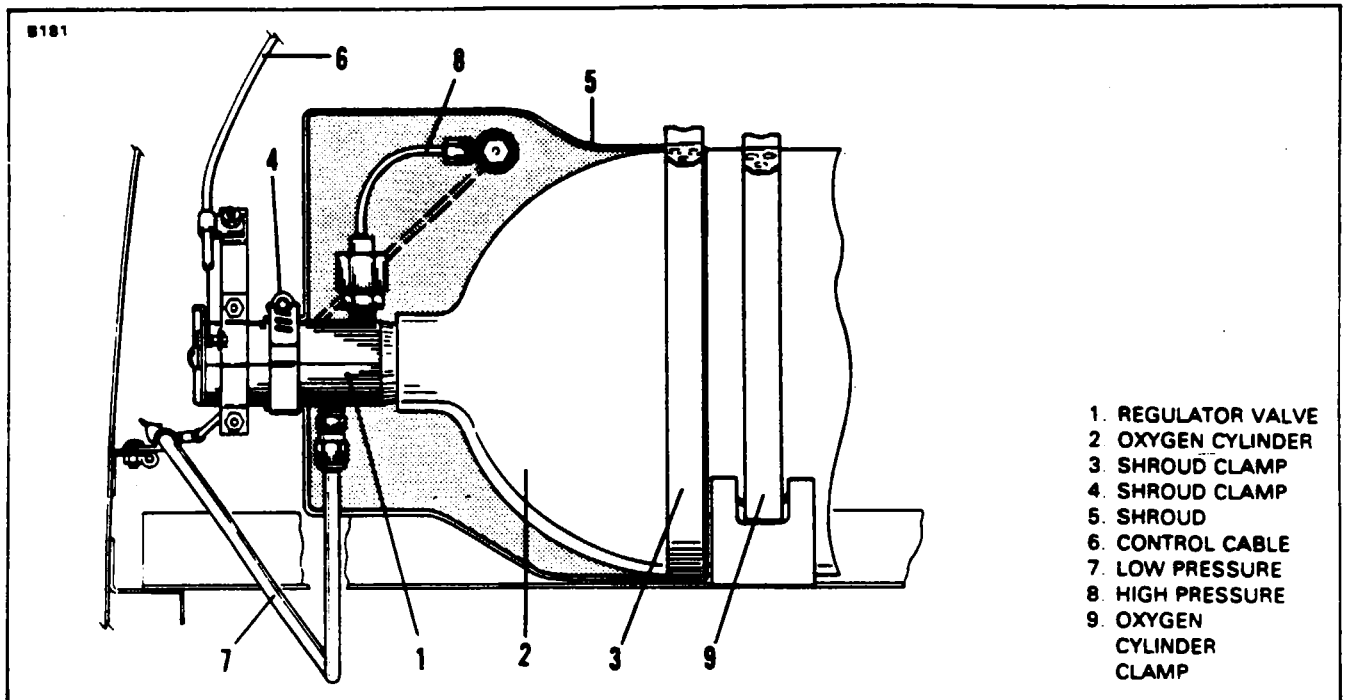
Oxygen Cylinder and Regulator Assembly
